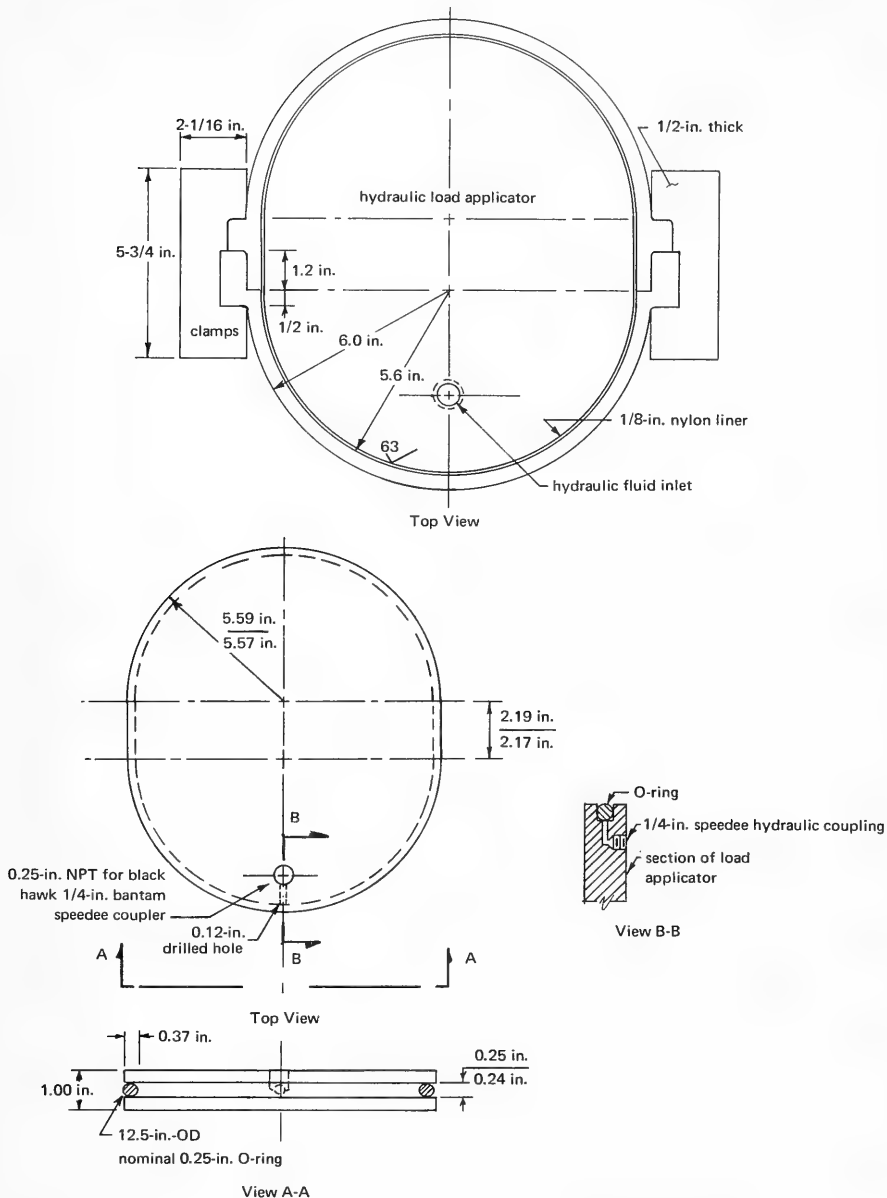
Test assembly composed of two-dimensional model of hemispherical end closure mounted on hydraulic load applicator.
